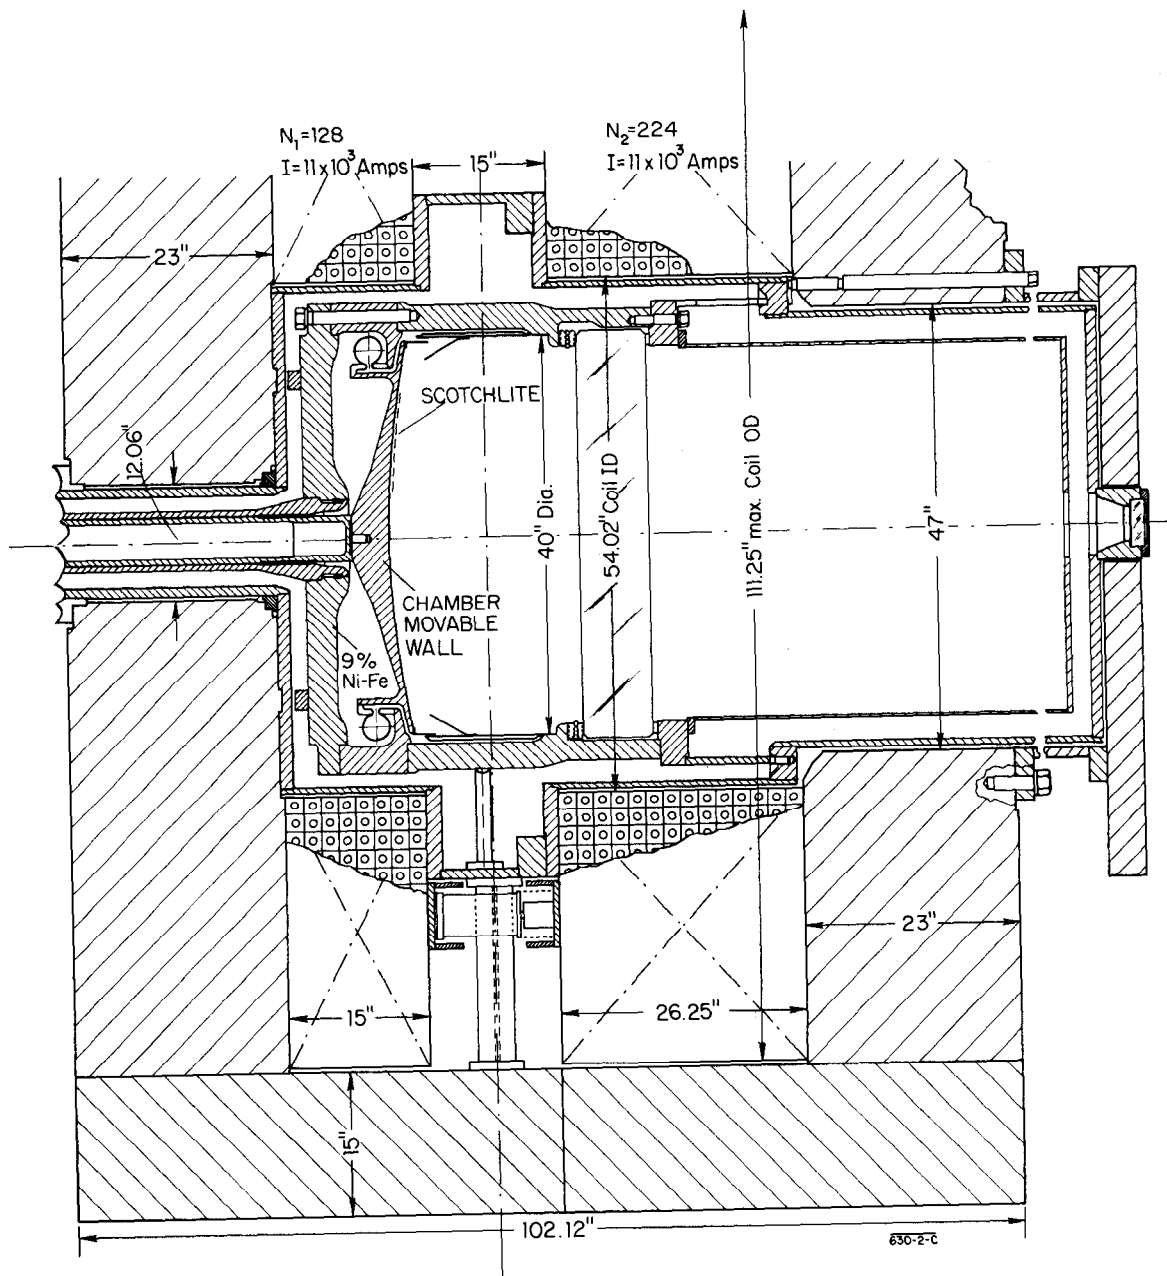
SLAC 1-meter bubble chamber and magnet assembly.
